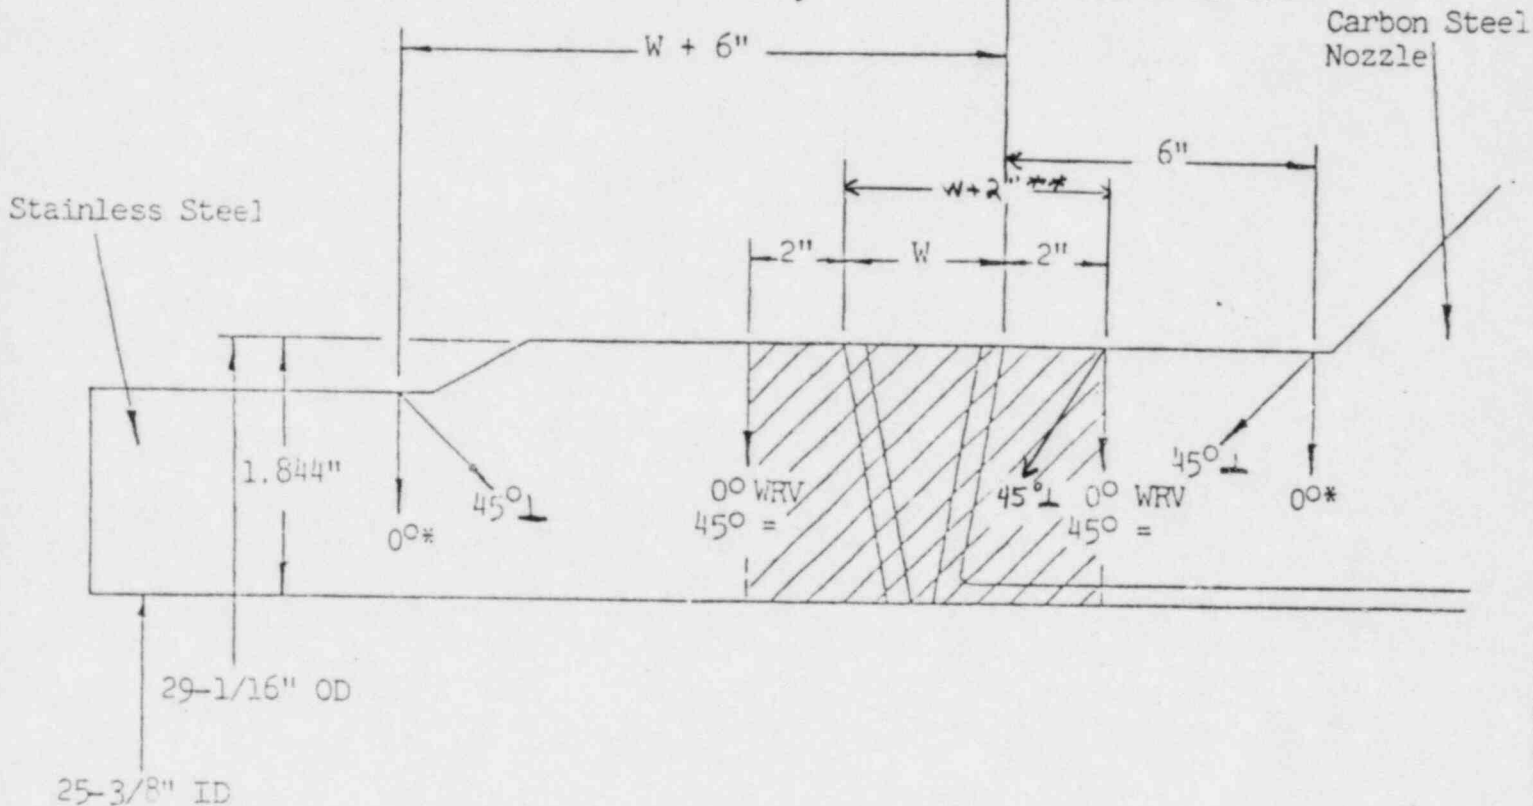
Ultrasonic Examination Procedures for Recirculation Outlet Nozzle Saffend Welds (Cal. Block RC-OUT)
